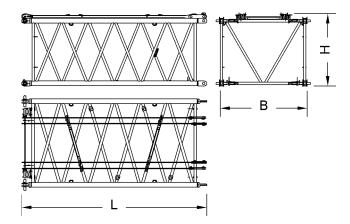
2821 boom section dimensions 20 ft for LR1300/LR1300W
